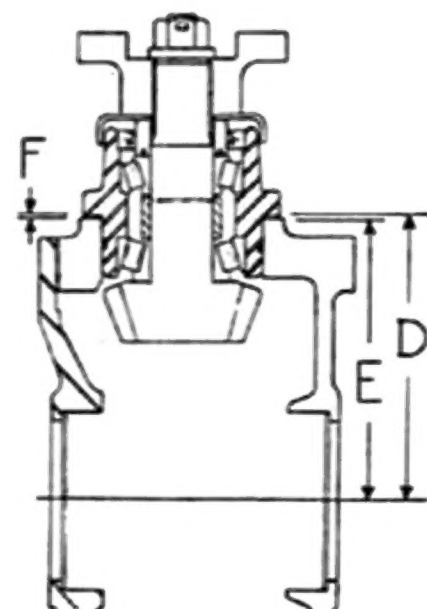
To determine thickness of shim pack (F), subtract dimension (E) from dimension (D). Refer to text.
